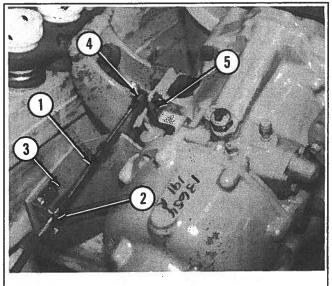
Single-Station Shift Cable Assembly – Front Mount
